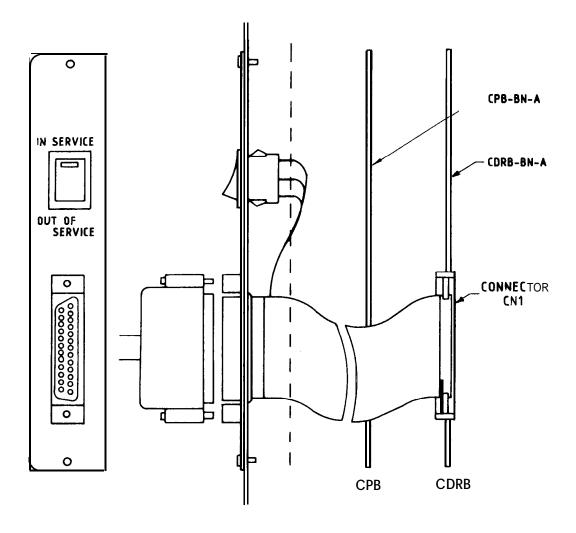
(e) MOUNTING OF JACK ASSEMBLY
